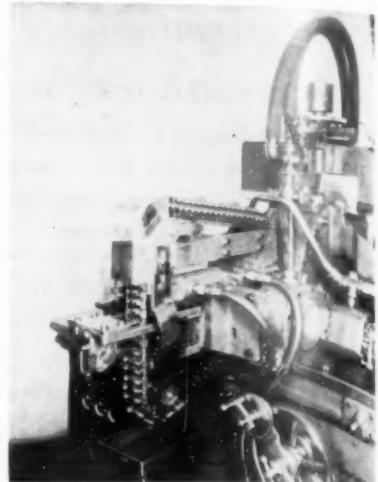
Chain-type floating fixture with work loaded in position on automatic grinding machine.
